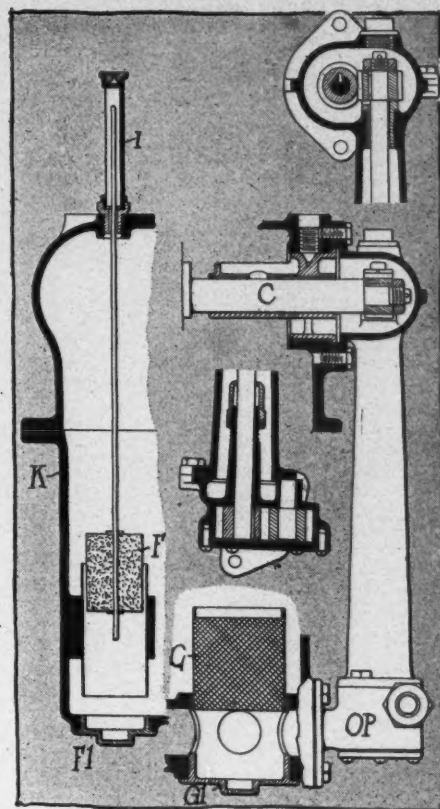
LOCOMOBILE OIL PUMP DETAILS
